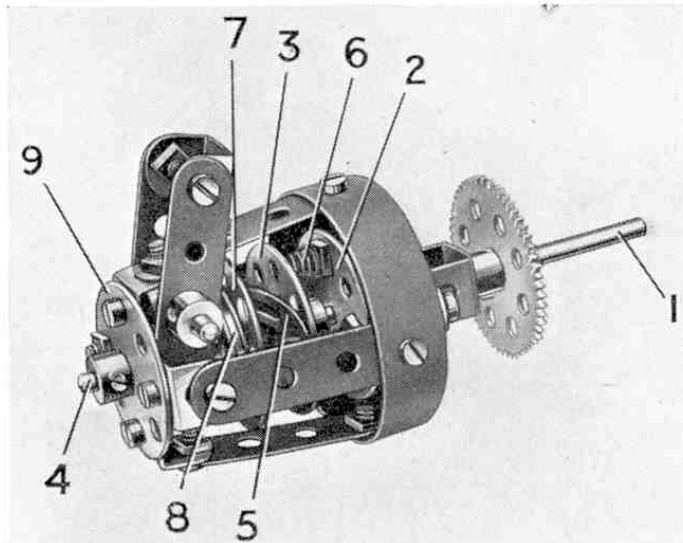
A compact but very efficient clutch, which can be easily modified by fitting or removing Compression Springs, according to the weight of the model of which it is part.
